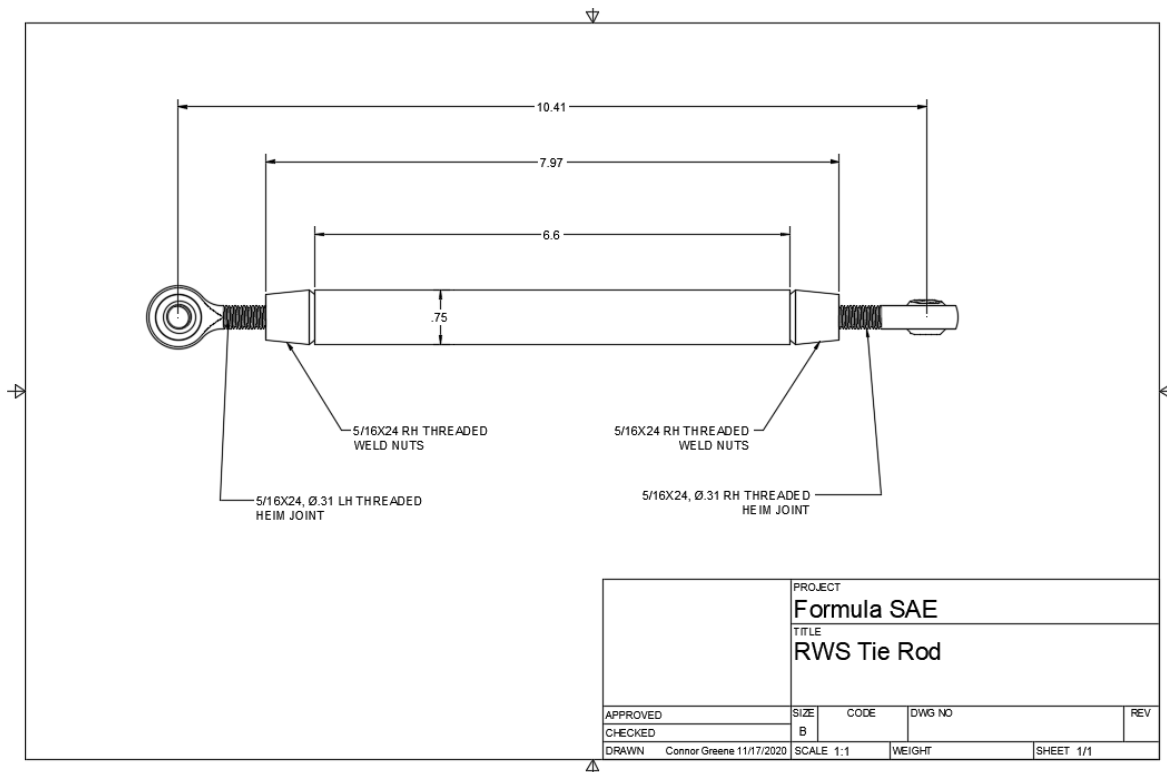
Dimensioned Drawing of Tie-Rod in RWS subsystem.
